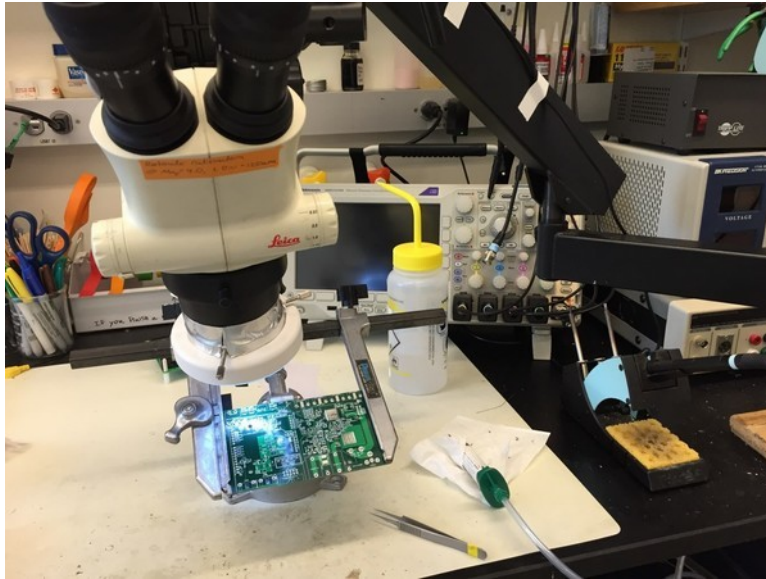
Instead of populating components on a table, holding the PCB using a PanaVise can be helpful.
